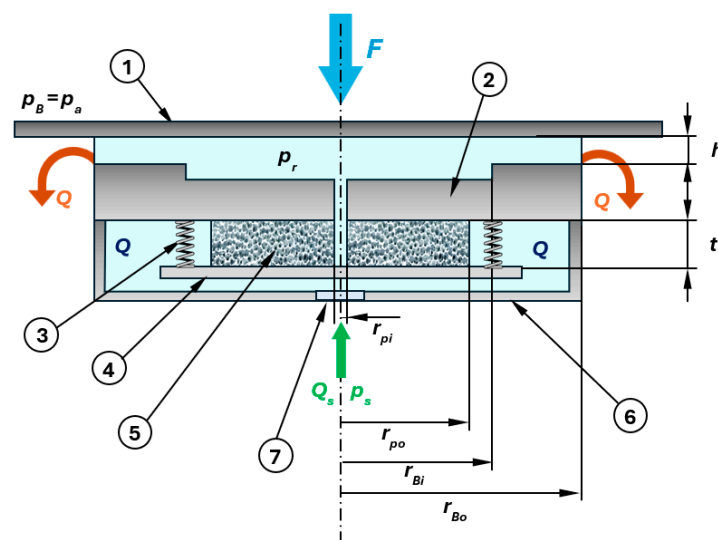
Aerostatic bearing with central recess model: 1—upper pad; 2—lower pad; 3—springs; 4—pressure plate; 5—porous material; 6—air chamber; 7—supply orifice.
